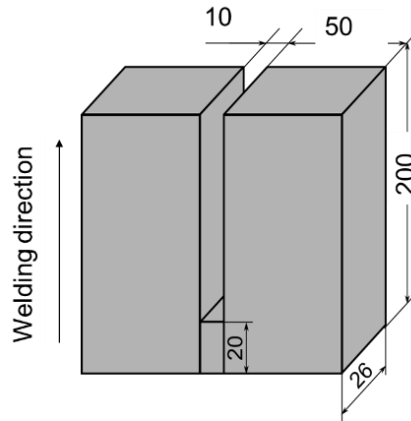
Specimen dimension used for hot-wire laser welding shows configuration of vertical joint alignment.
